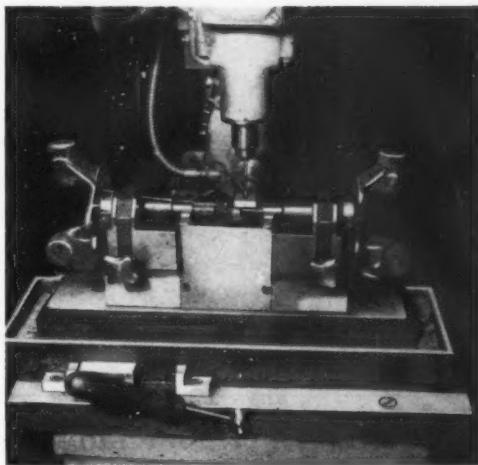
This Special-purpose Gemo Machine is Employed for Drilling Two Holes, at 90 Deg. to Each Other in the Threaded Ends of the Spigots
